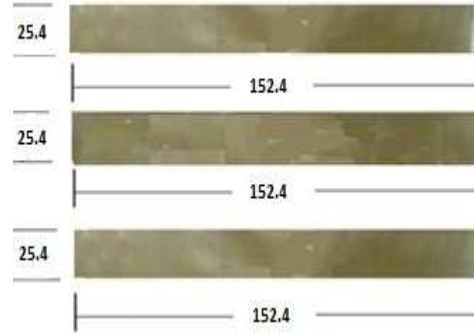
Three sheared strips from developed composite sheet for testing. The dimensions are in mm.
